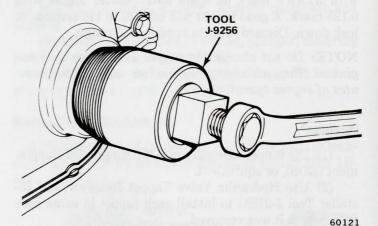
B-87 Timing Case Cover Oil Seal Removal
